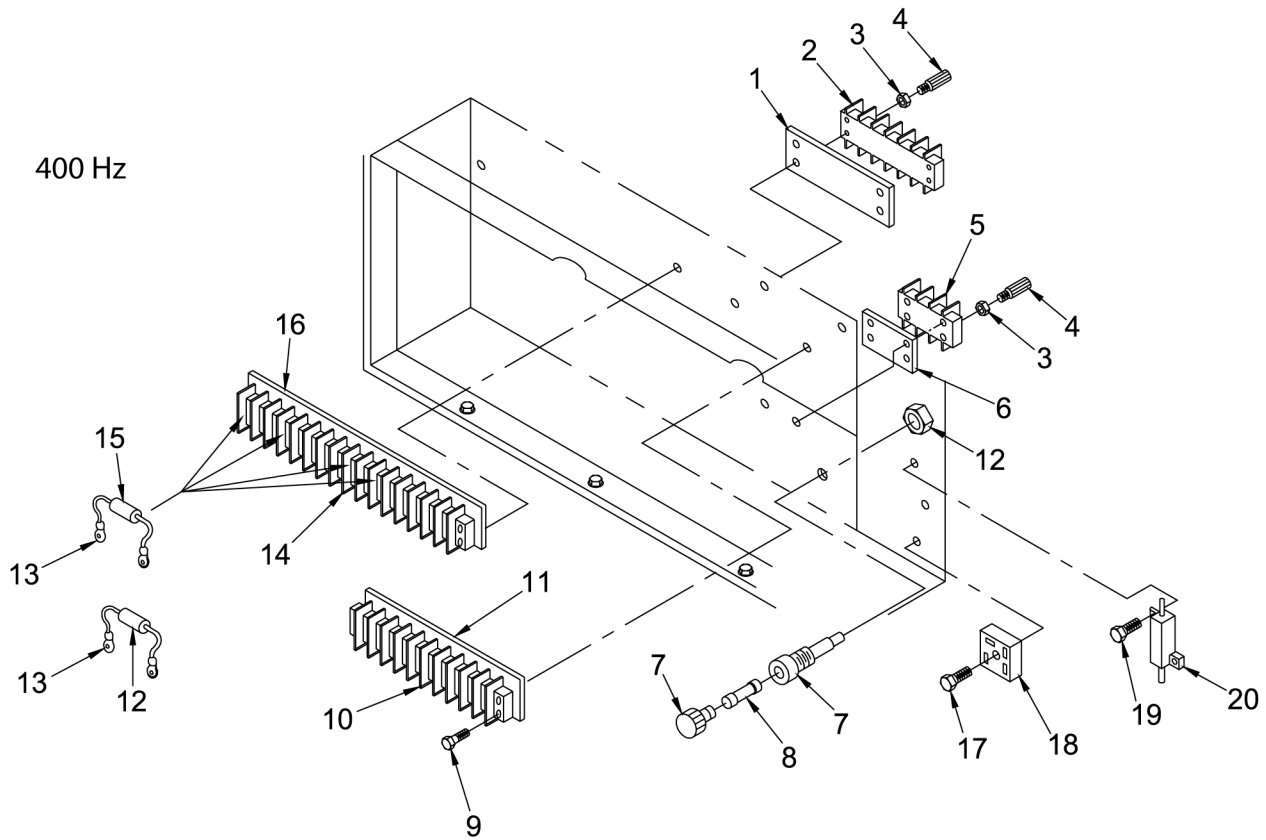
Control Box Assembly/Control Panel Assembly, (60/400 Hz) (Sheet 2 of 2).
